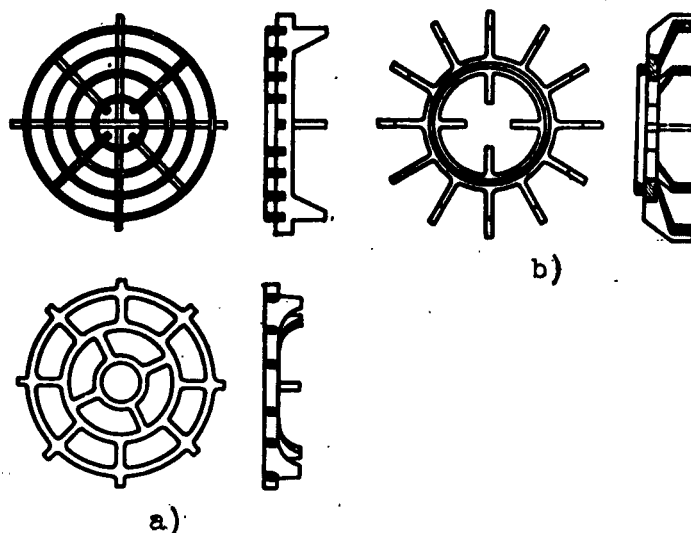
Examples of grid designs employed in solid-propellant rocket engines. a) Grids for multigrain charges (stamped-and-welded and cast versions); b) grid for single-grain charge.
